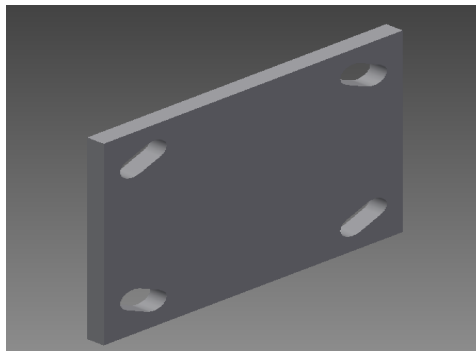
Square tube adaptor plate. CAD draft of the square tube adaptor plate in the mechanical system.
